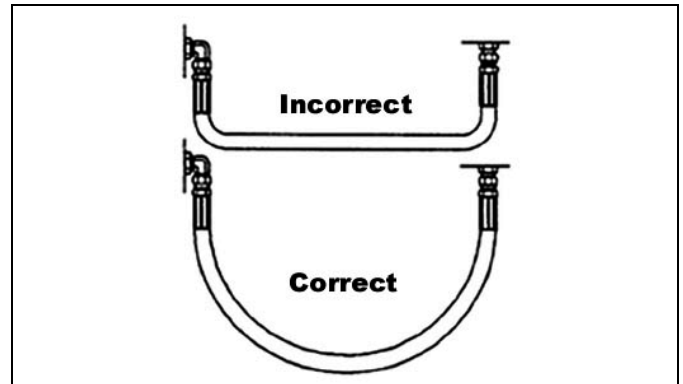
Hose manufacturers minimum bend radius recommendations should be observed for both static connections and for connections to moveable mechanisms. Bend radius for connections with moveable mechanisms should be checked over the entire range of motion to prevent damage to the hose/tube assembly or connectors.
